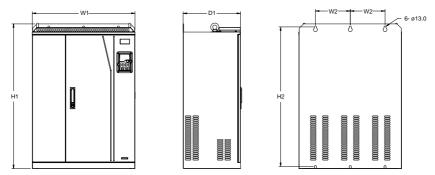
660V 250-355kW VFD wall-mounting diagram
